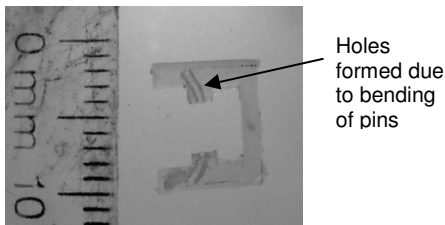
INJECTION MOLDED SECOND STAGE PART FOR UNCONSTRAINED PIN.
